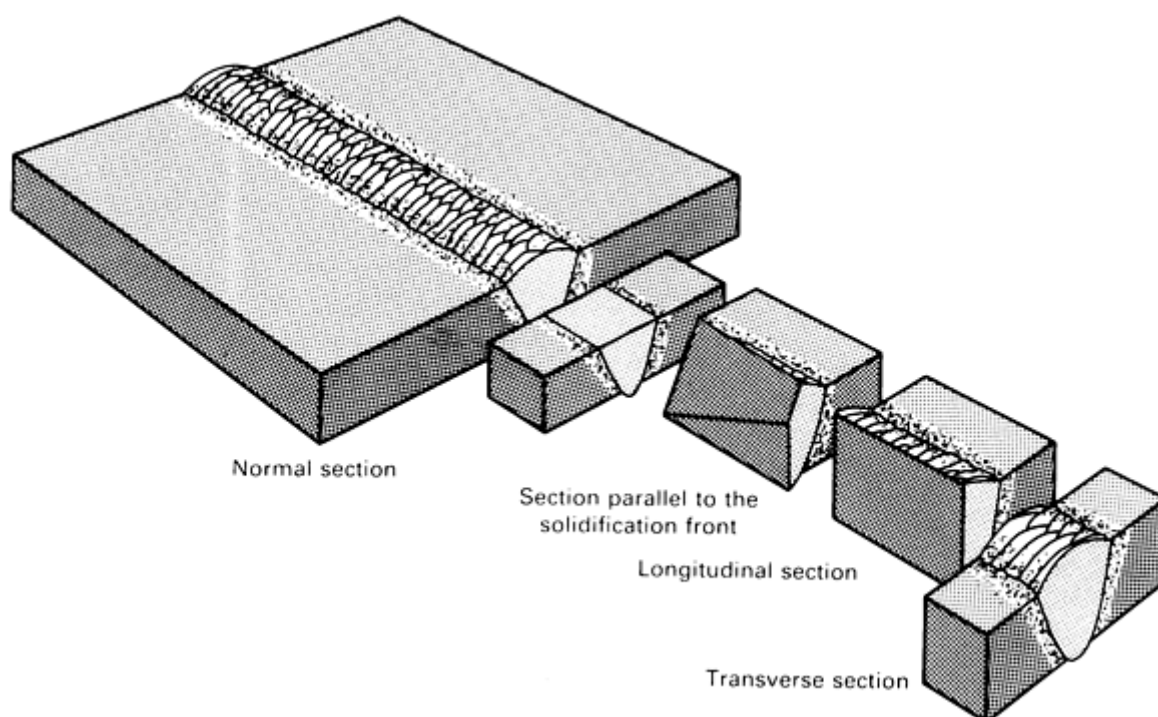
TYPICAL SECTIONS USED IN THE METALLOGRAPHIC EXAMINATION OF WELDED JOINTS
